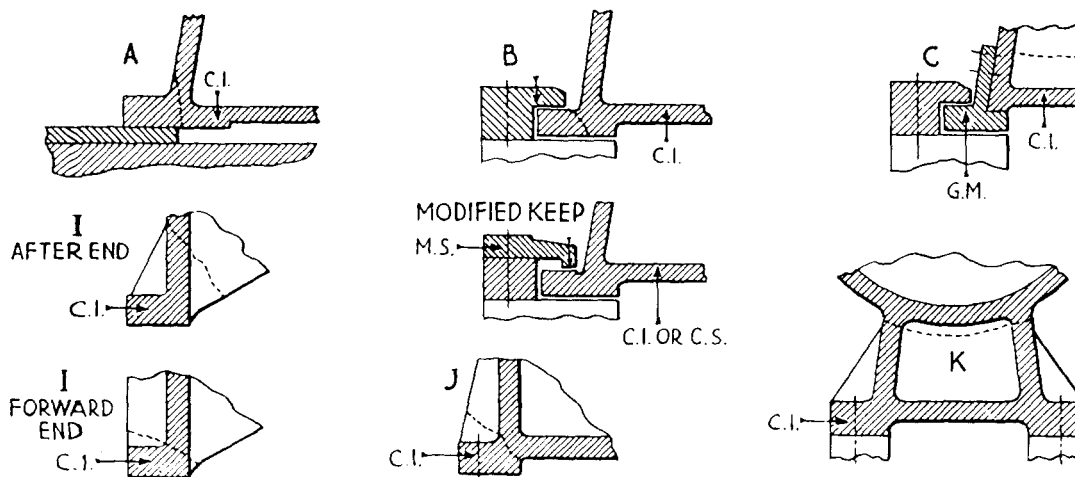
ILLUSTRATION OF FRACTURES ON FIG. 10
